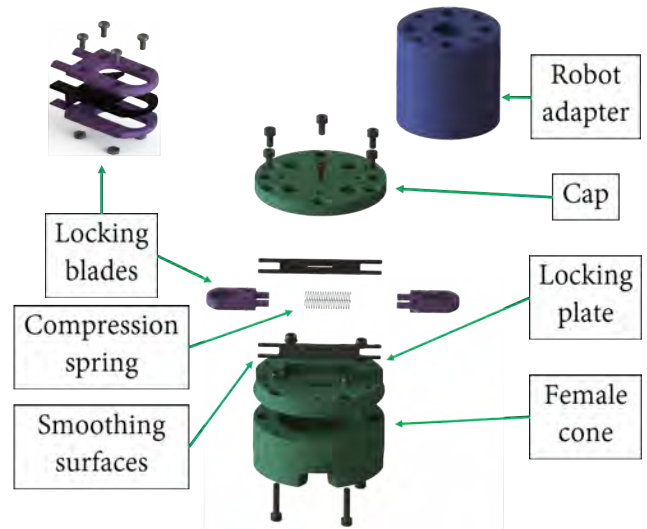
The robot component is mounted to the robotic arm and is designed to connect to the tool component, cone and locking blades. The outer diameter of the current design is 80mm. The robot component can be mounted to a variety of robots by redesigning the robot adapter (blue part at the top right).
